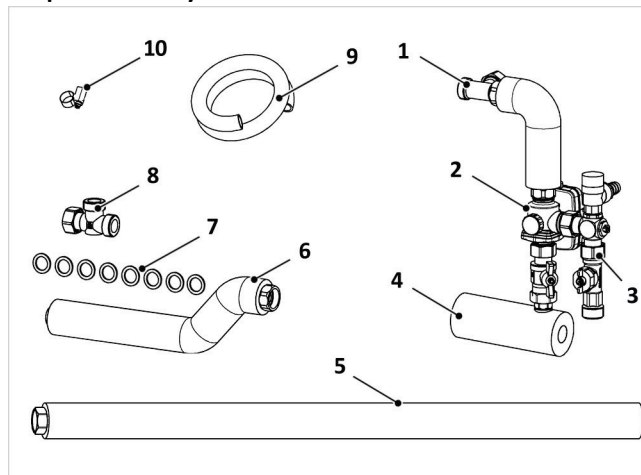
Assembly pack for LM WP-VSG / WP-SL-VSG 3-W valve
